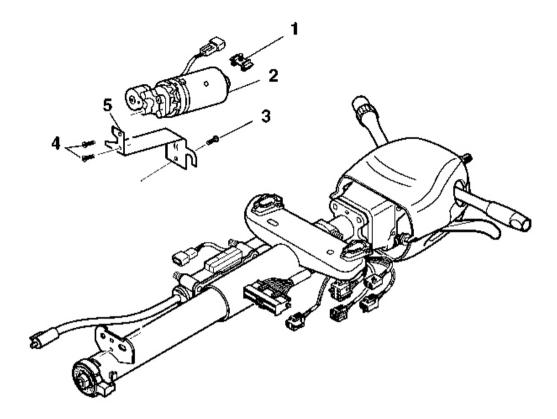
Connector Clip, Telescope Drive Motor Assembly Connector, 2 Pan Head Tapping Screws & Telescope Drive Bracket Courtesy of GENERAL MOTORS CORP.
